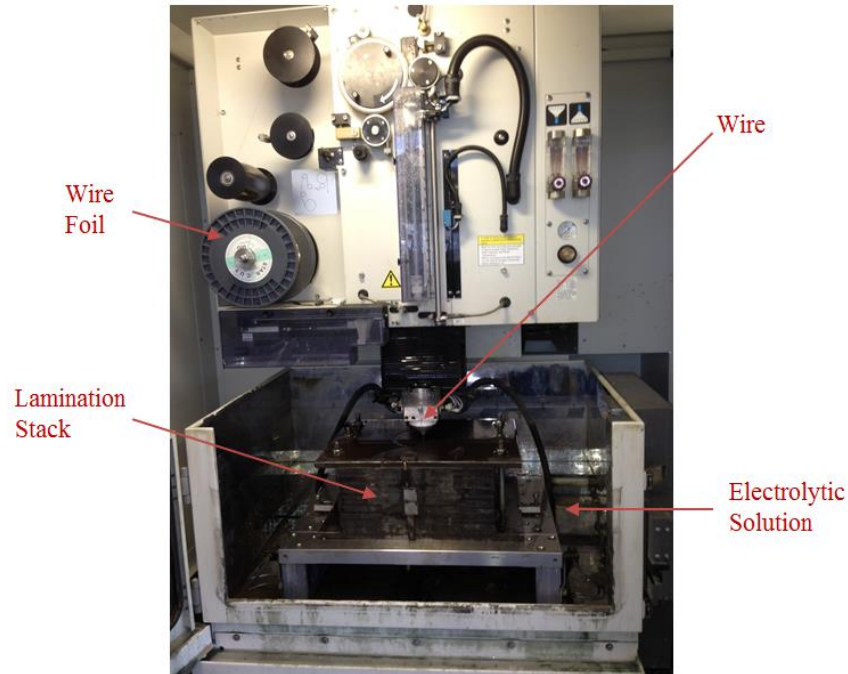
Lamination Stack While Inside the Wire Cutting Machine.
